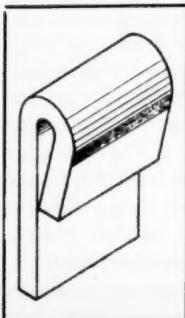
This bend is similar to that in Fig. 4 except that a half-round instead of a square tool was used.
